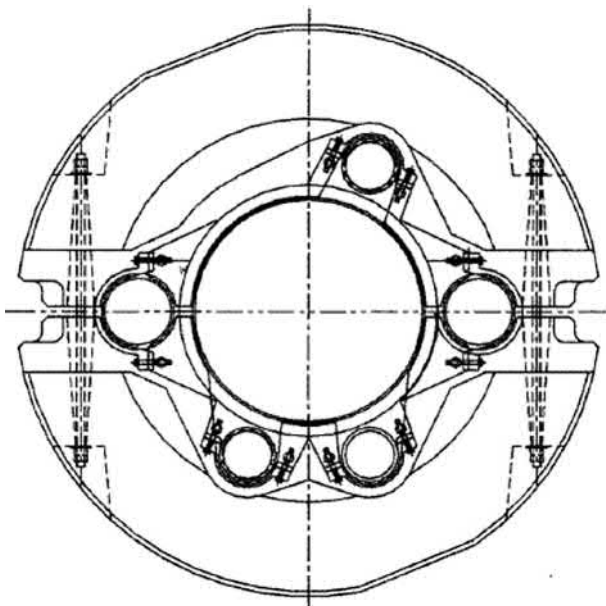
Typical riser joint cross-section. *Source: Elsevier.
